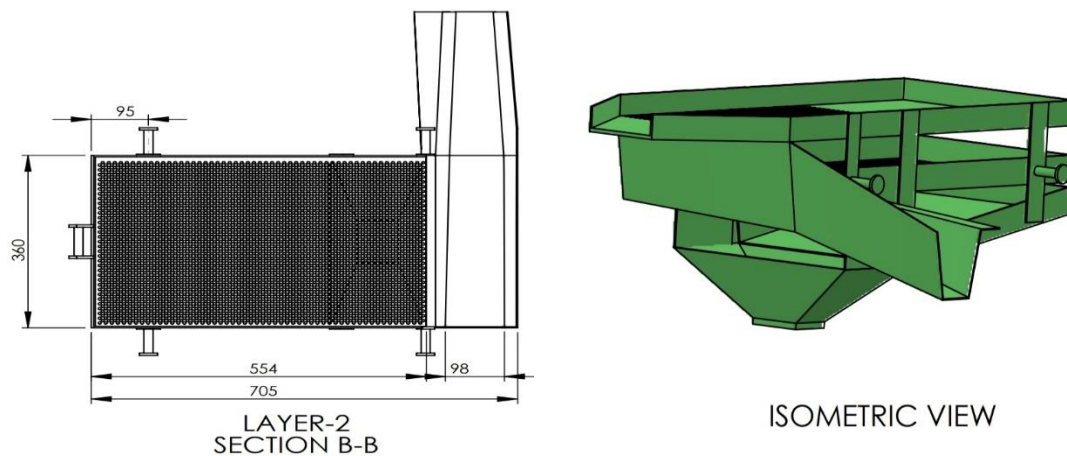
Diagram and isometric view of sieve and sieve assembly
